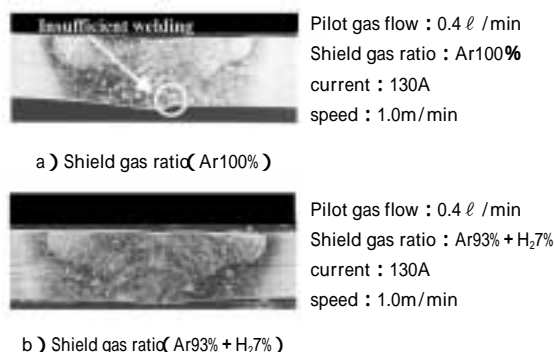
Relation between Shield Gas Element and Weld Shape
